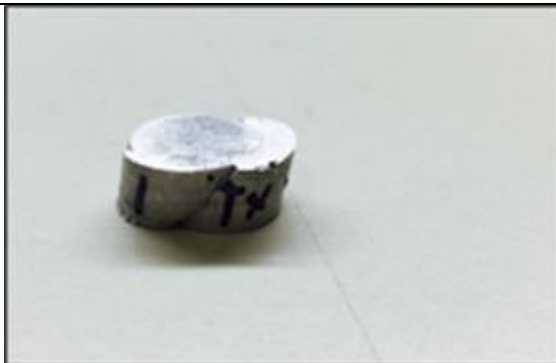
Failure of AA7055-T4 Aluminium alloy (Front view)
